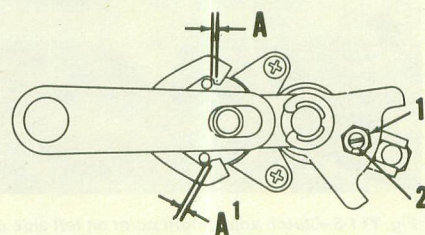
Turn eccentric screw (2) until clearance is (A) is equal.
